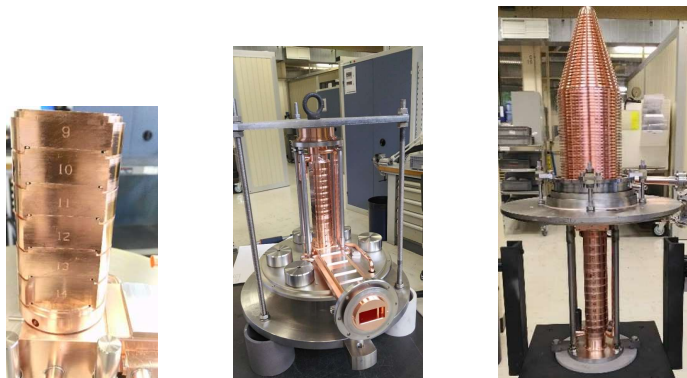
Left: Partial cavities assembly. Center: Interaction line and output wave guide ready for brazing. Right: Tube closed.
